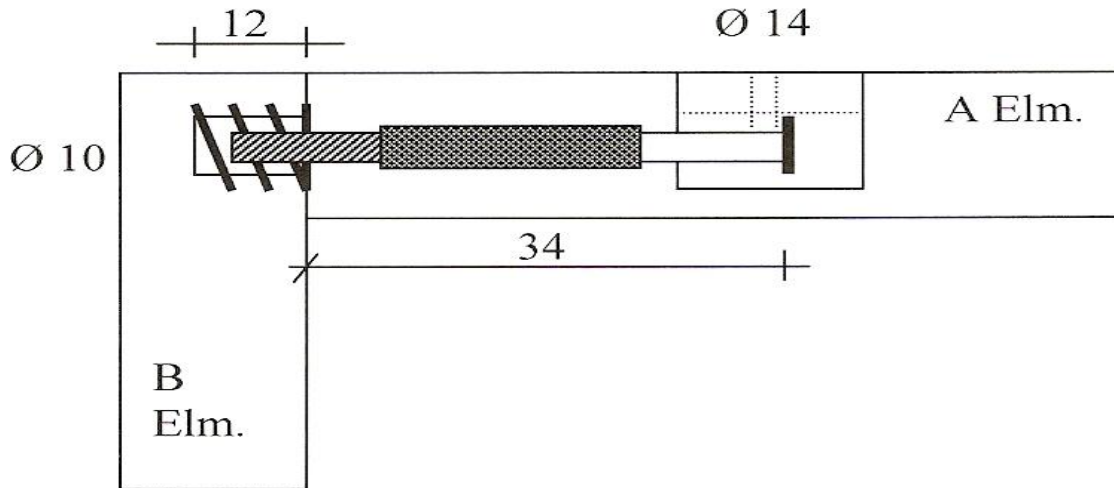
Details of L-type specimen joined with metal minifix (in mm).
